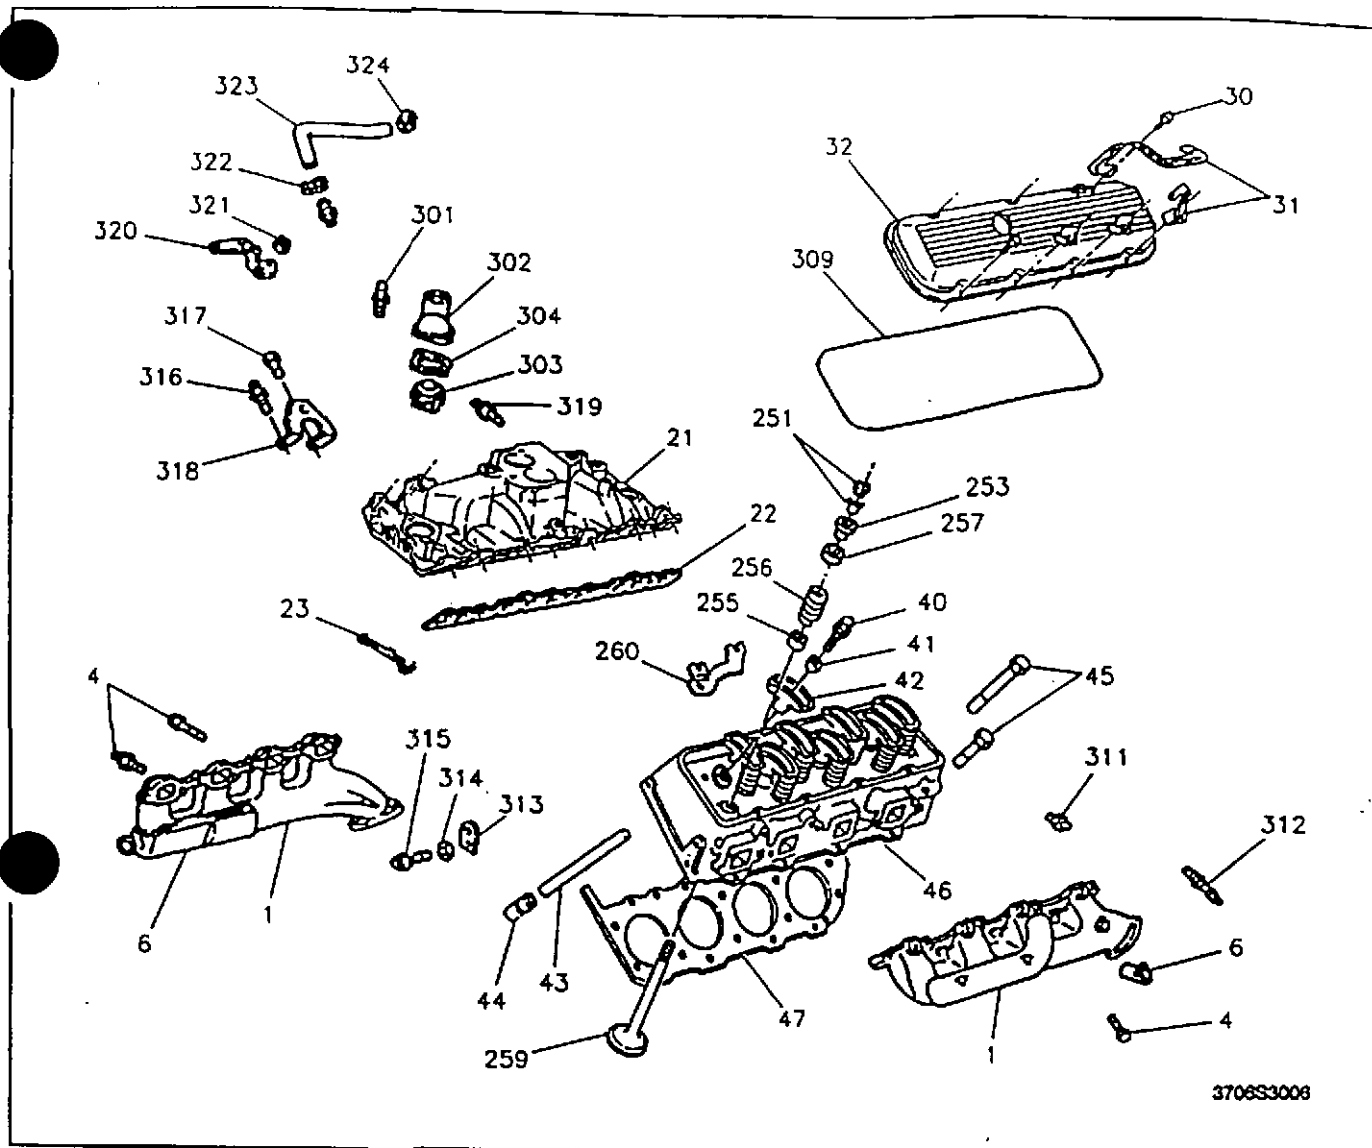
Cylinder Head, Manifolds, and Components (7.4L Engine)
